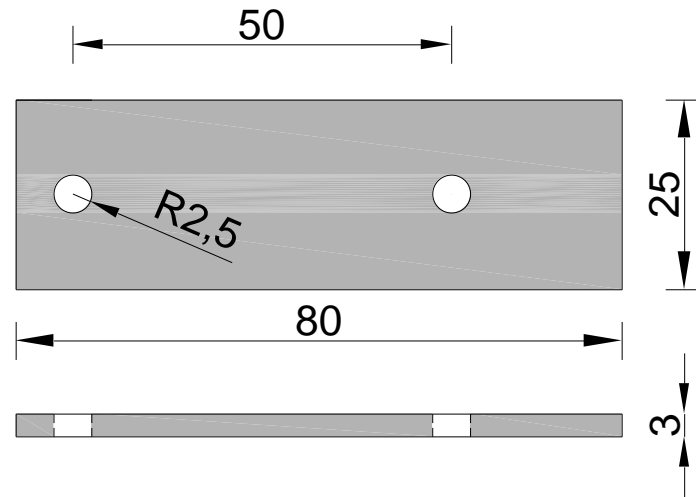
Geometrical configuration of the steel specimen. Sizes in mm.
